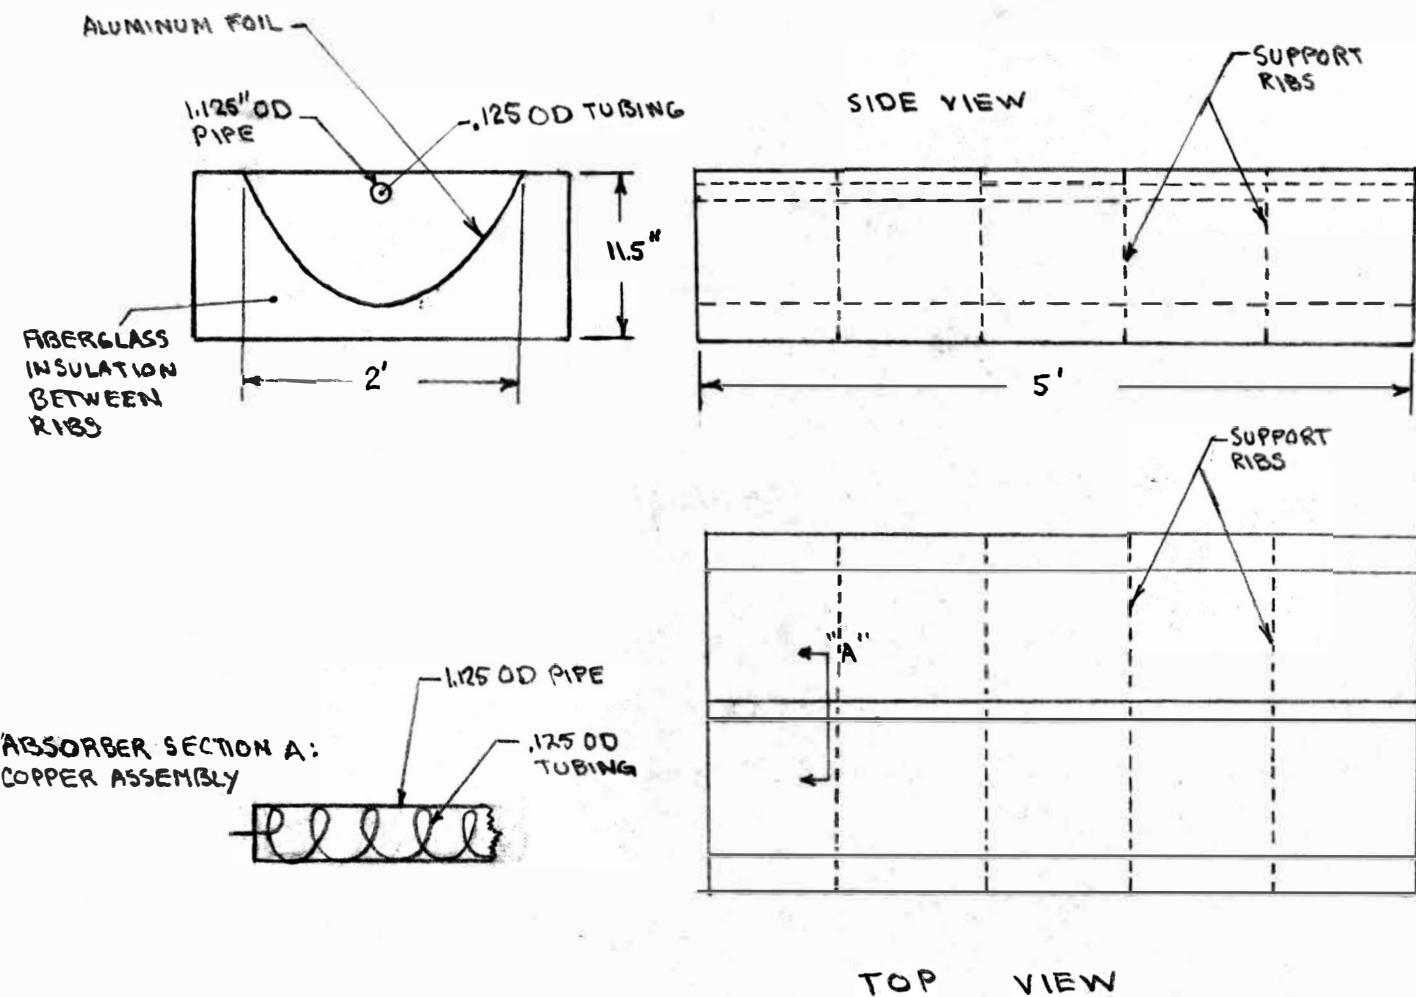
Drawing depicting prototype parabolic collector and copper absorber assembly.
